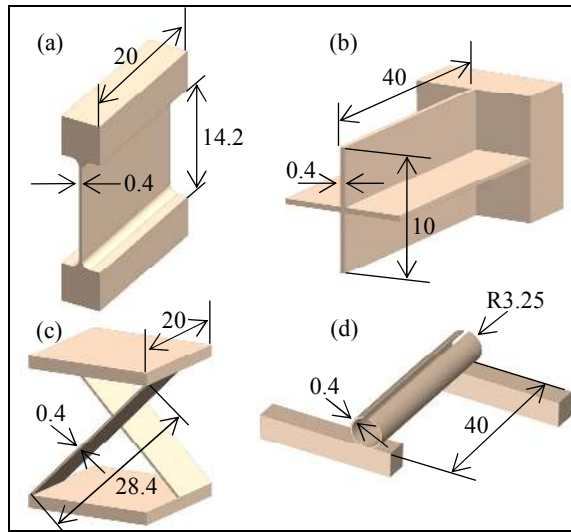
Dimensions (in mm) of chosen large deflection flexures (a) Corner filleted flexure (b) Cruciform flexure (c) Cross pivot flexure (d) Split tube flexure
